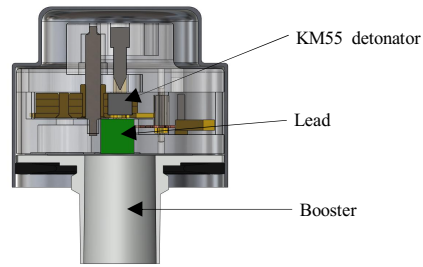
40mm K502 Fuze Shape & Explosive Train
